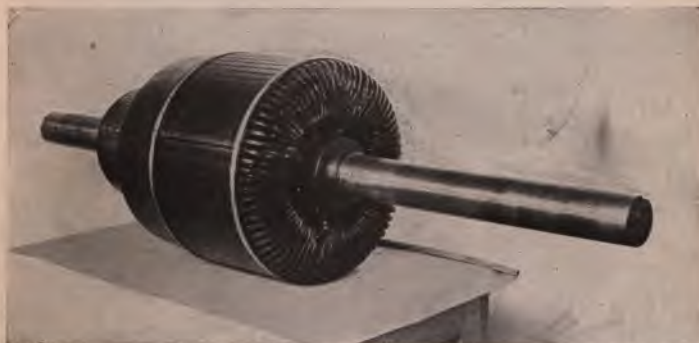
View of a Ring-wound Armature (Early Type). Crocker-Wheeler Co.
